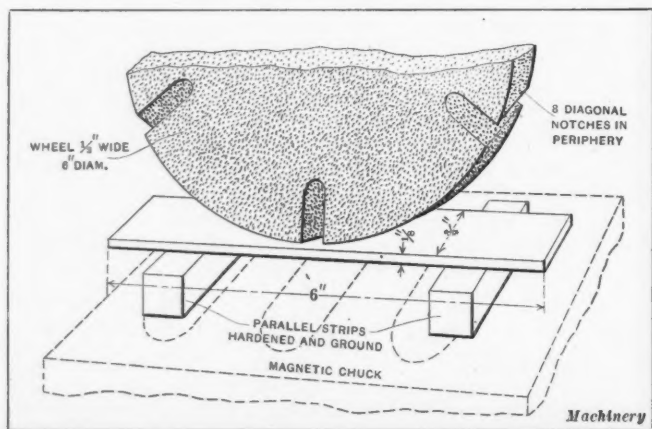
Method of holding a Thin Piece to prevent warping when grinding Dry
